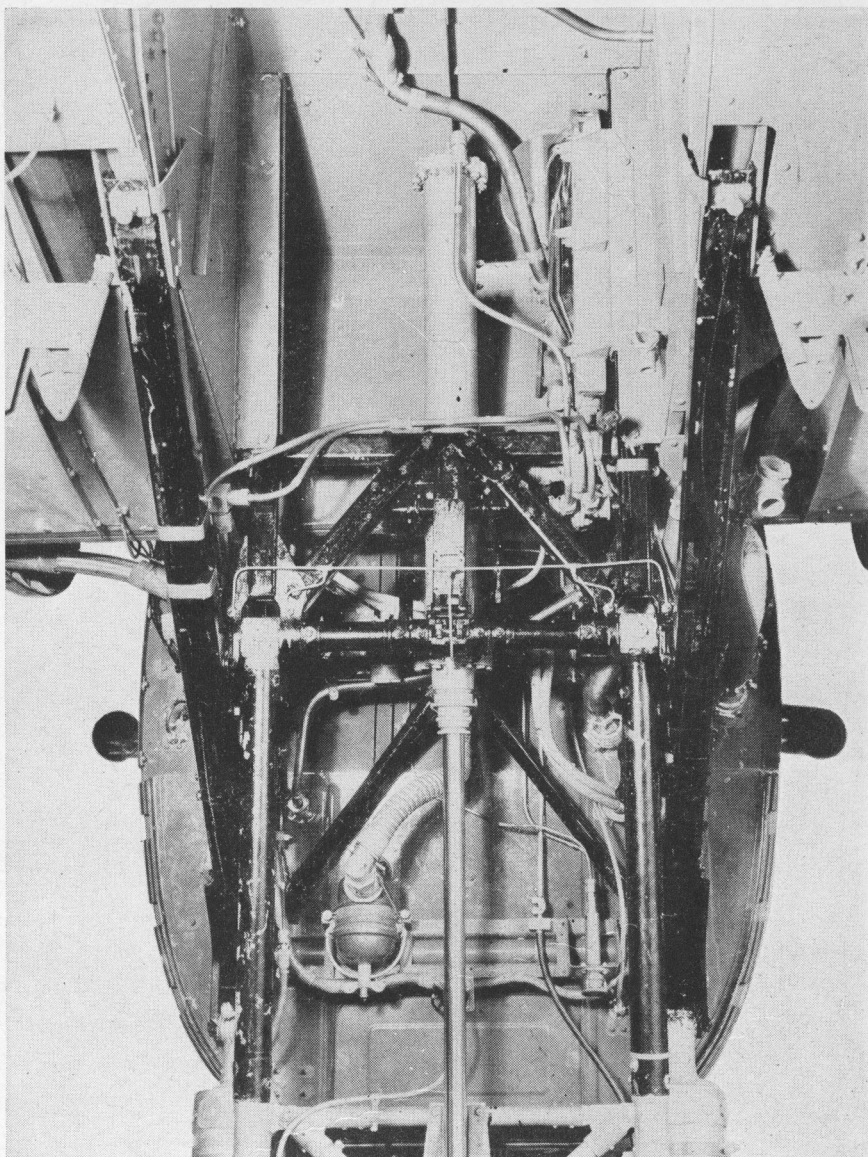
A landing gear hydraulic cylinder as seen from the rear, when looking forward and upward, with the gear extended. Jointed radius rods, which hold the gear in DOWN position, are hinged onto a cross member in the center. The carburetor and induction-system priming pumps, accessible only when the gear is lowered, are seen inside the cross members.
